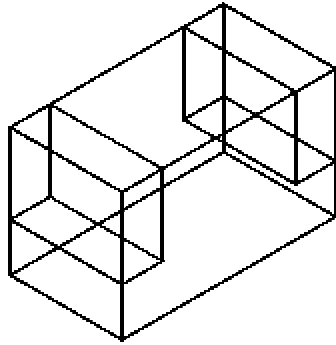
Figure showing boxes moved inside the bigger box using the midpoints
